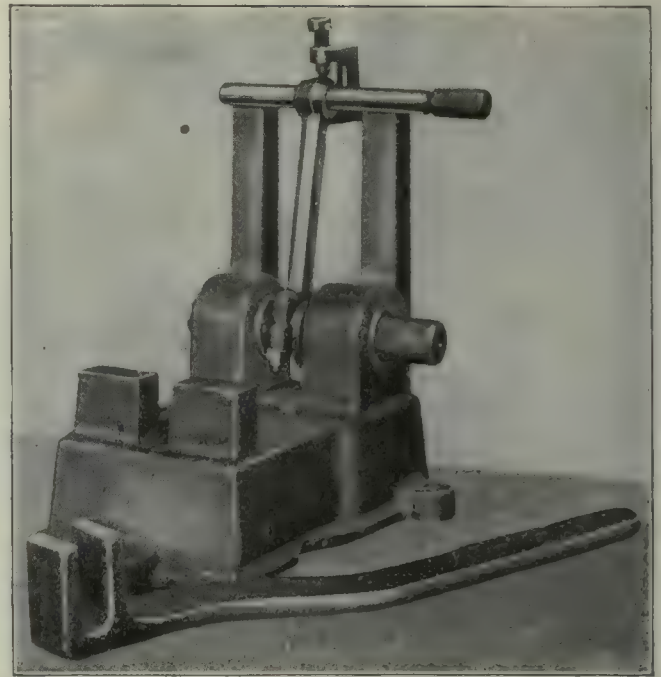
CONNECTING-ROD ALIGNMENT JIG
